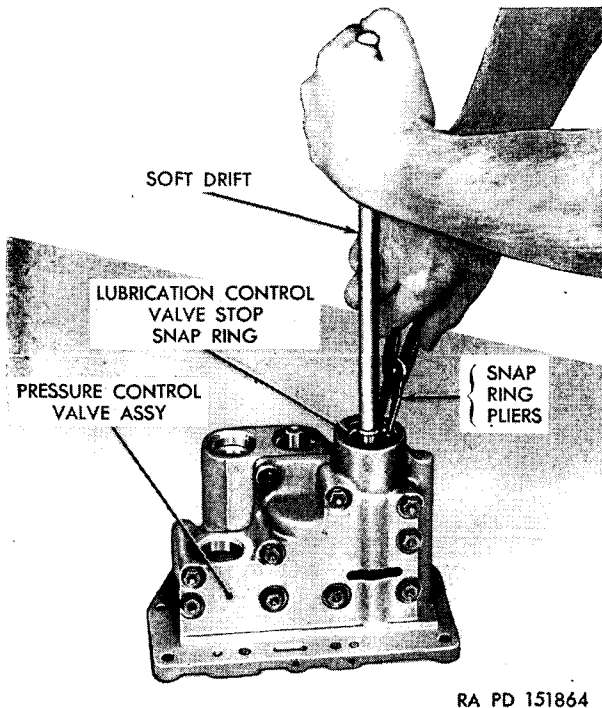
Removing or installing lubrication-control-valve stop snap ring.
